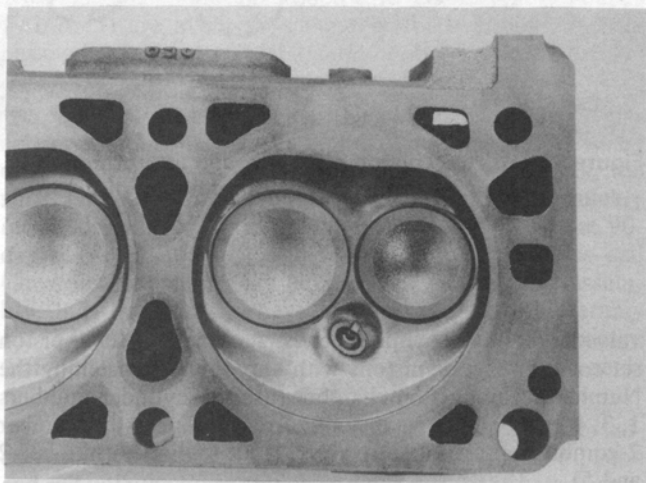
Modify combustion chambers in cast iron heads to unshroud valve heads.
